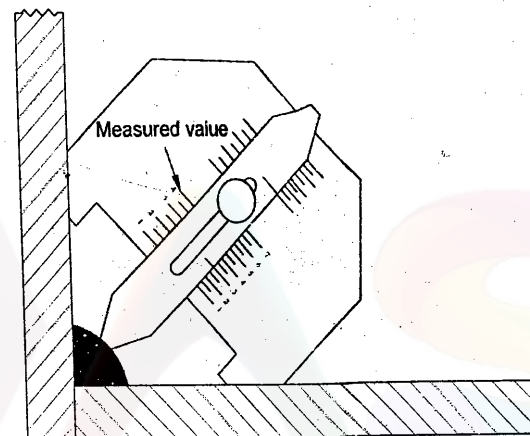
Checking the permissible tolerance of convexity
